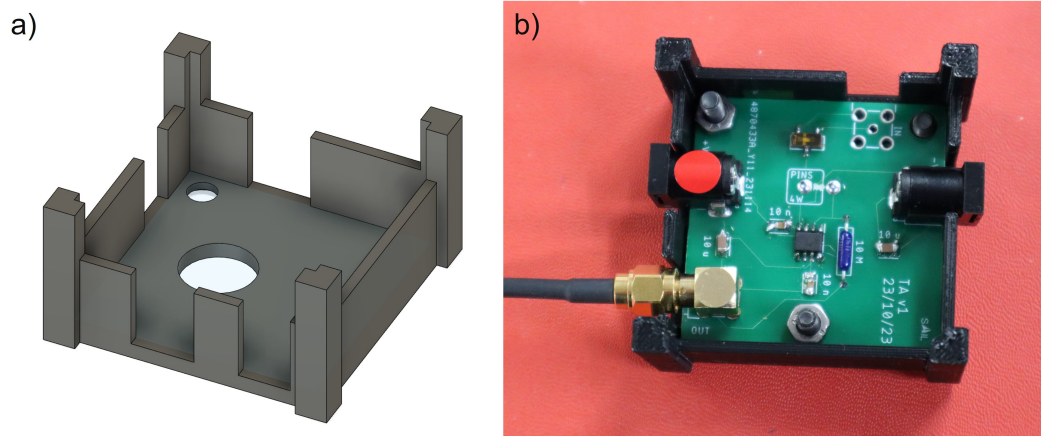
a) CAD design of the TA holder to secure it during testing. b) Picture showing the TA board fitted to the holder.
